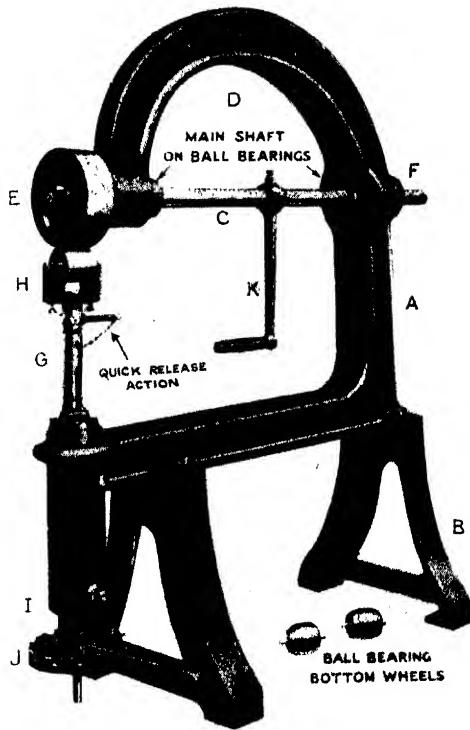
STANDARD TYPE OF WHEELING MACHINE
